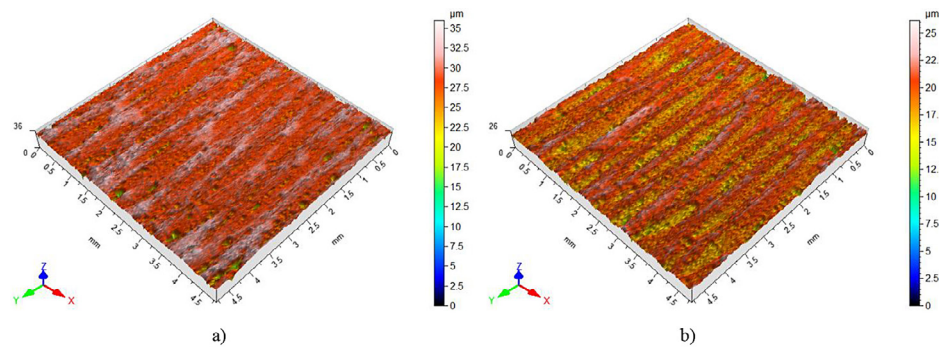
3D topography maps for the smallest 50 m/min (a) and largest 600 m/min (b) cutting speeds after milling the main surface of GFRP
